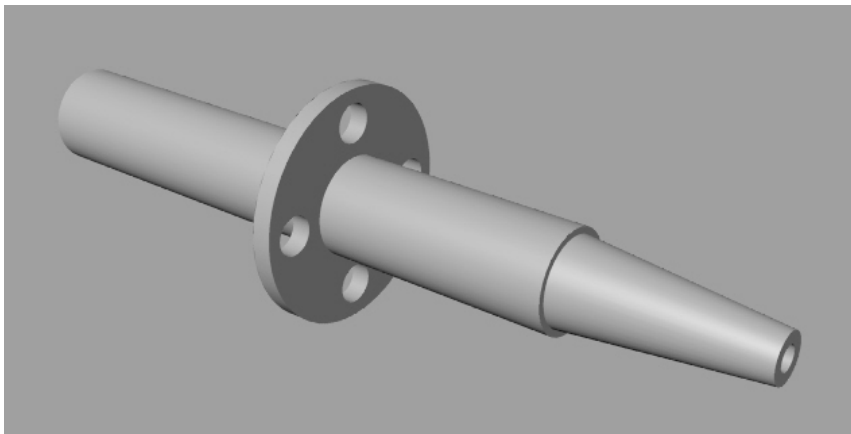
Part 5 – Supporting Rod and Spacer Disk (CAD Drawing)
